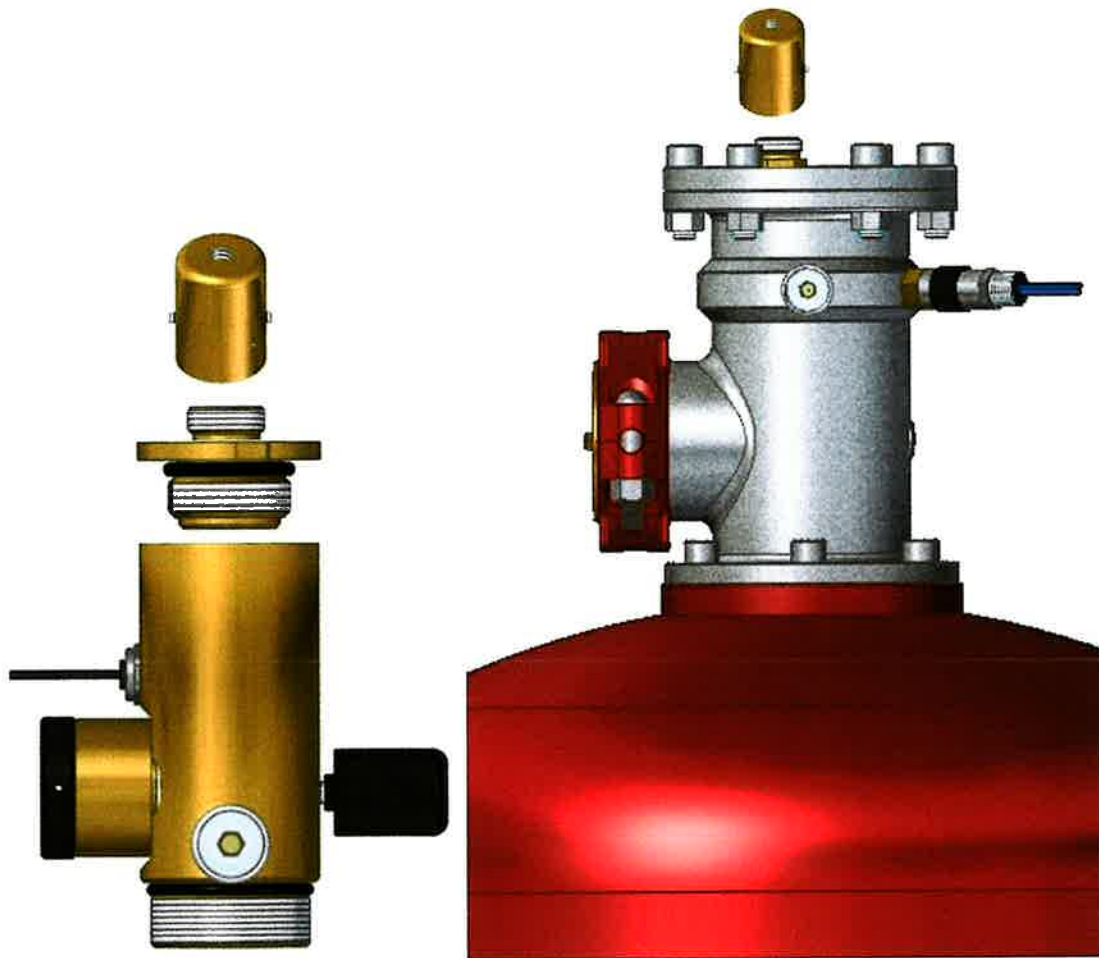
Pneumatic Actuator Operated Cylinder Valve
